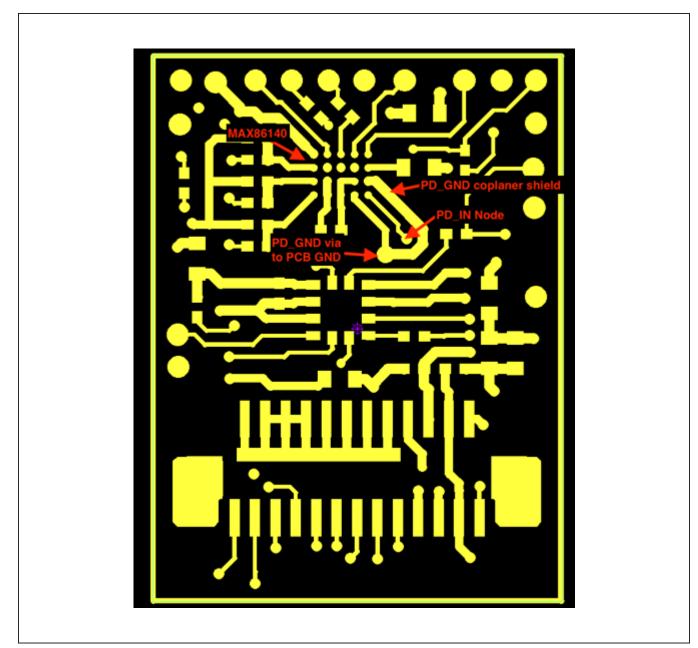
Example PCB Layout, Layer 1 (Top, MAX86140)
